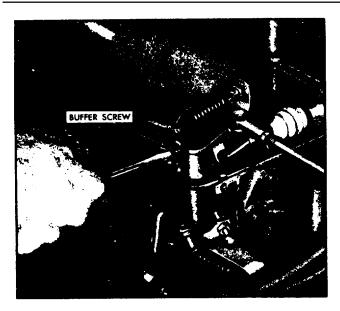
Adjusting Buffer Screw previously performed, to the minimum by backing off the outer lock nut (Fig. 8) until the end of the booster spring eye bolt is flush with the end of the nut.
